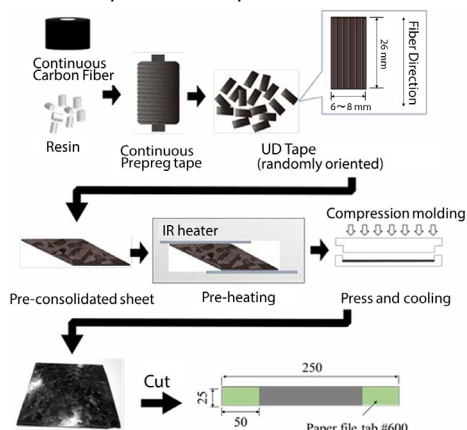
Molding Process and Specimen Geometry of Randomly Oriented CFRTP¹⁾
